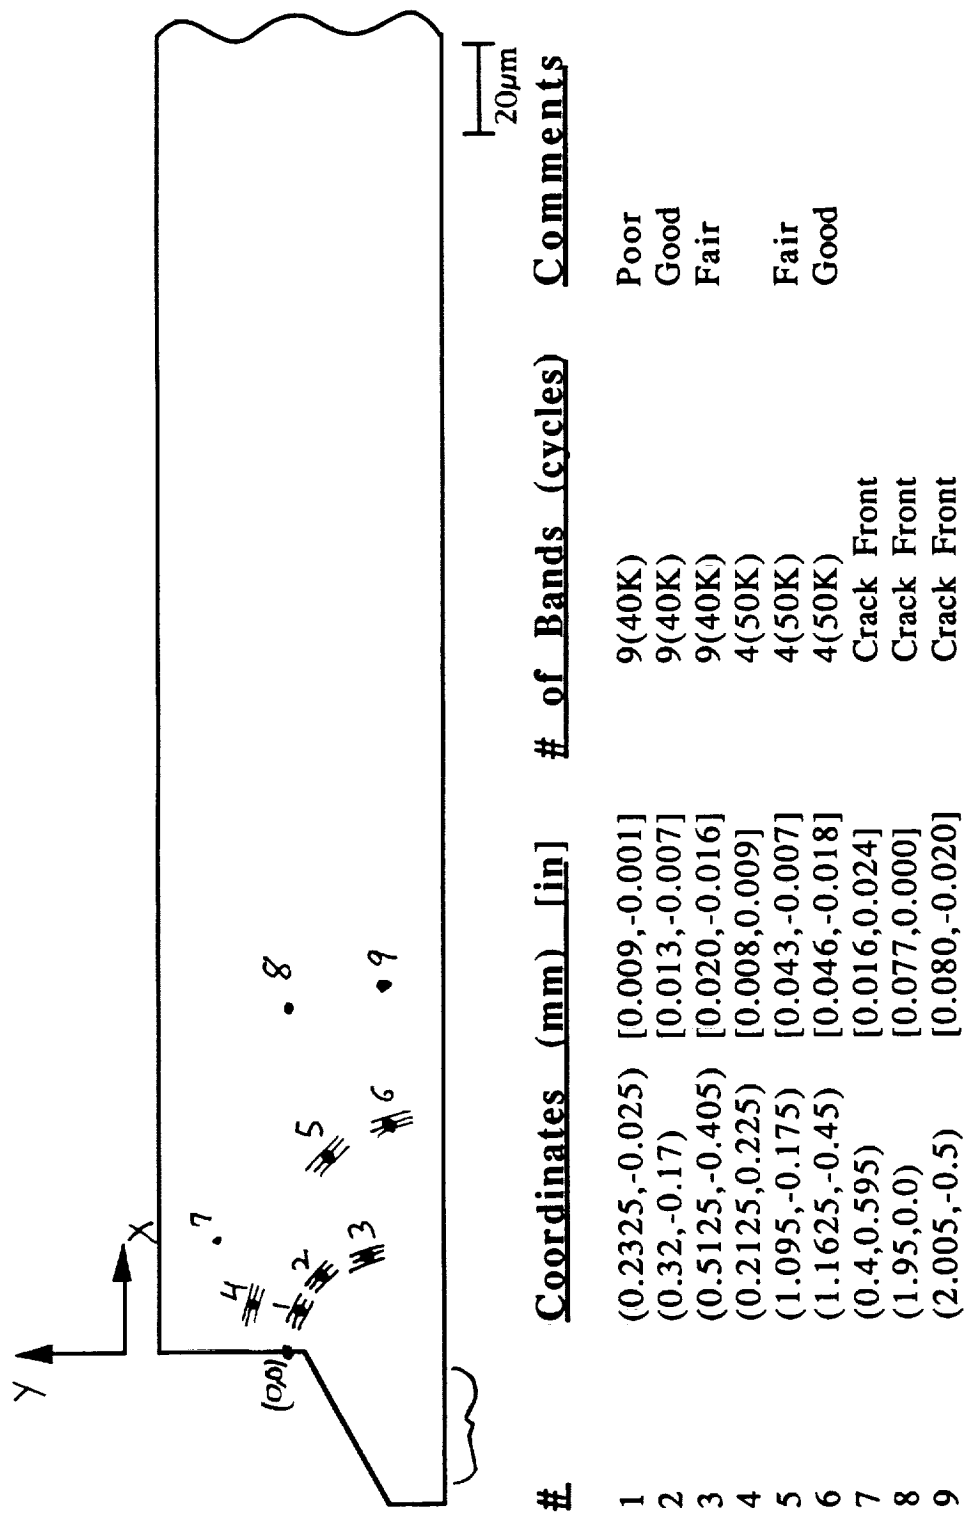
Rivet hole schematic: Upper rivet row, hole number 3J4, fatigue crack growth is in the forward direction.
